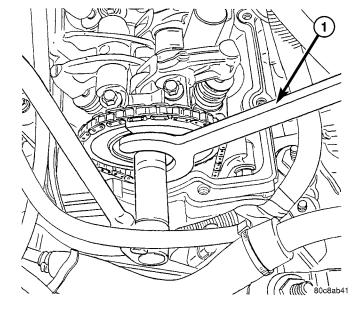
Special Tool 8435 - Camshaft Sprocket Holding Wrench
